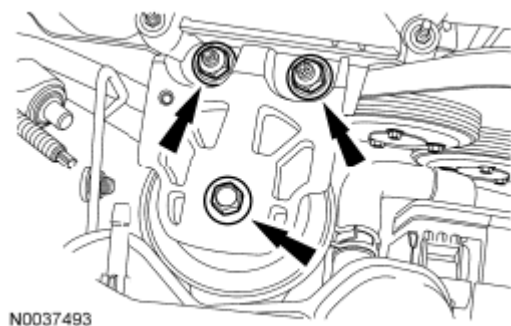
Locating Bolt, Nuts & Engine Mount Bracket
